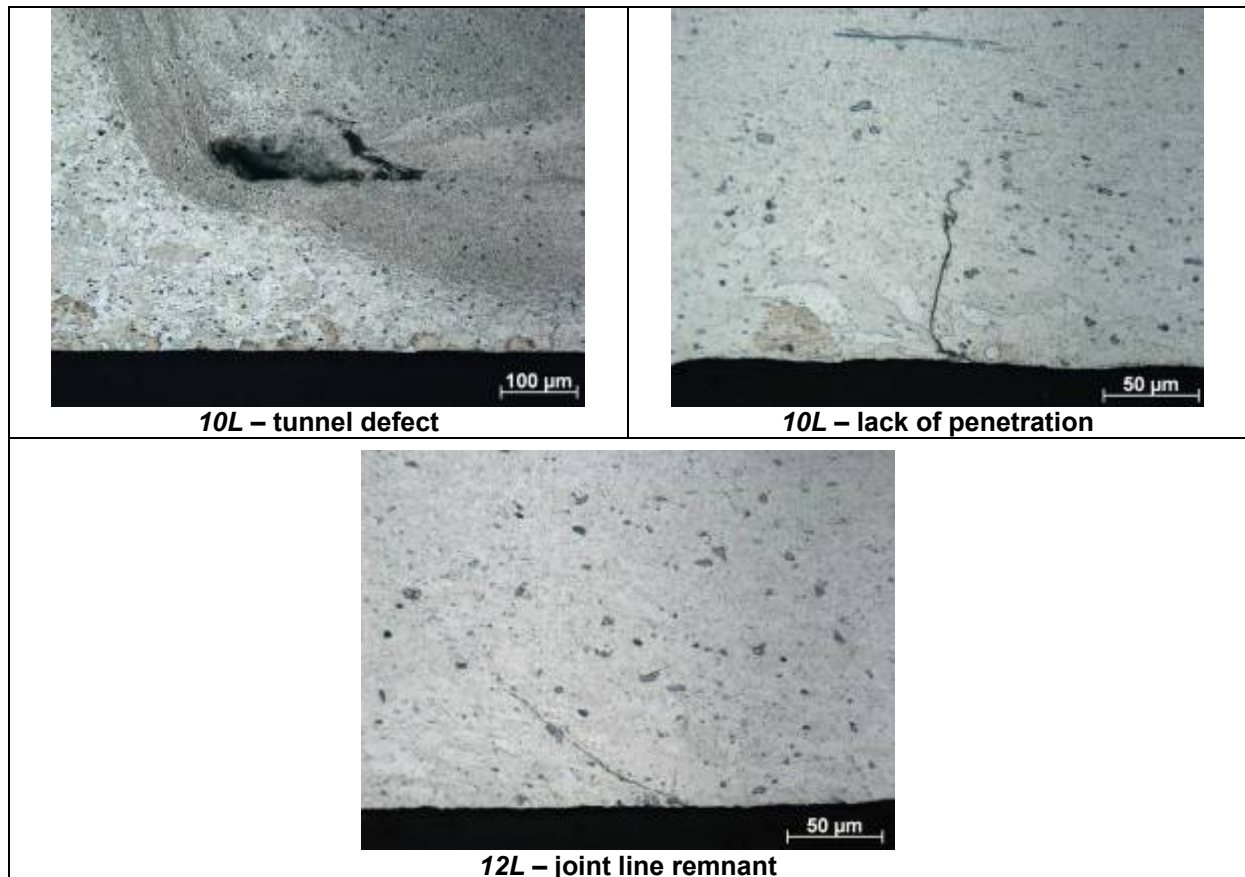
Microstructural defects observed in welds realised with "tool1".
